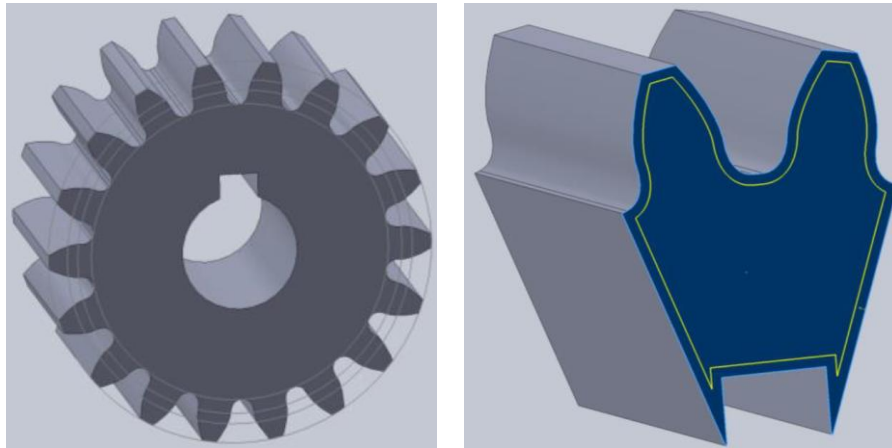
Studied gear geometry and shape (a) isometric view (b) critical section of the gear
